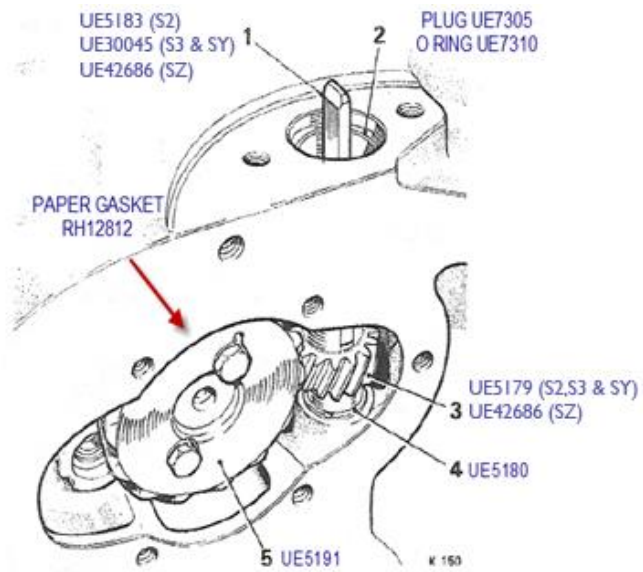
VIEW OF DISTRIBUTOR DRIVING GEARS
